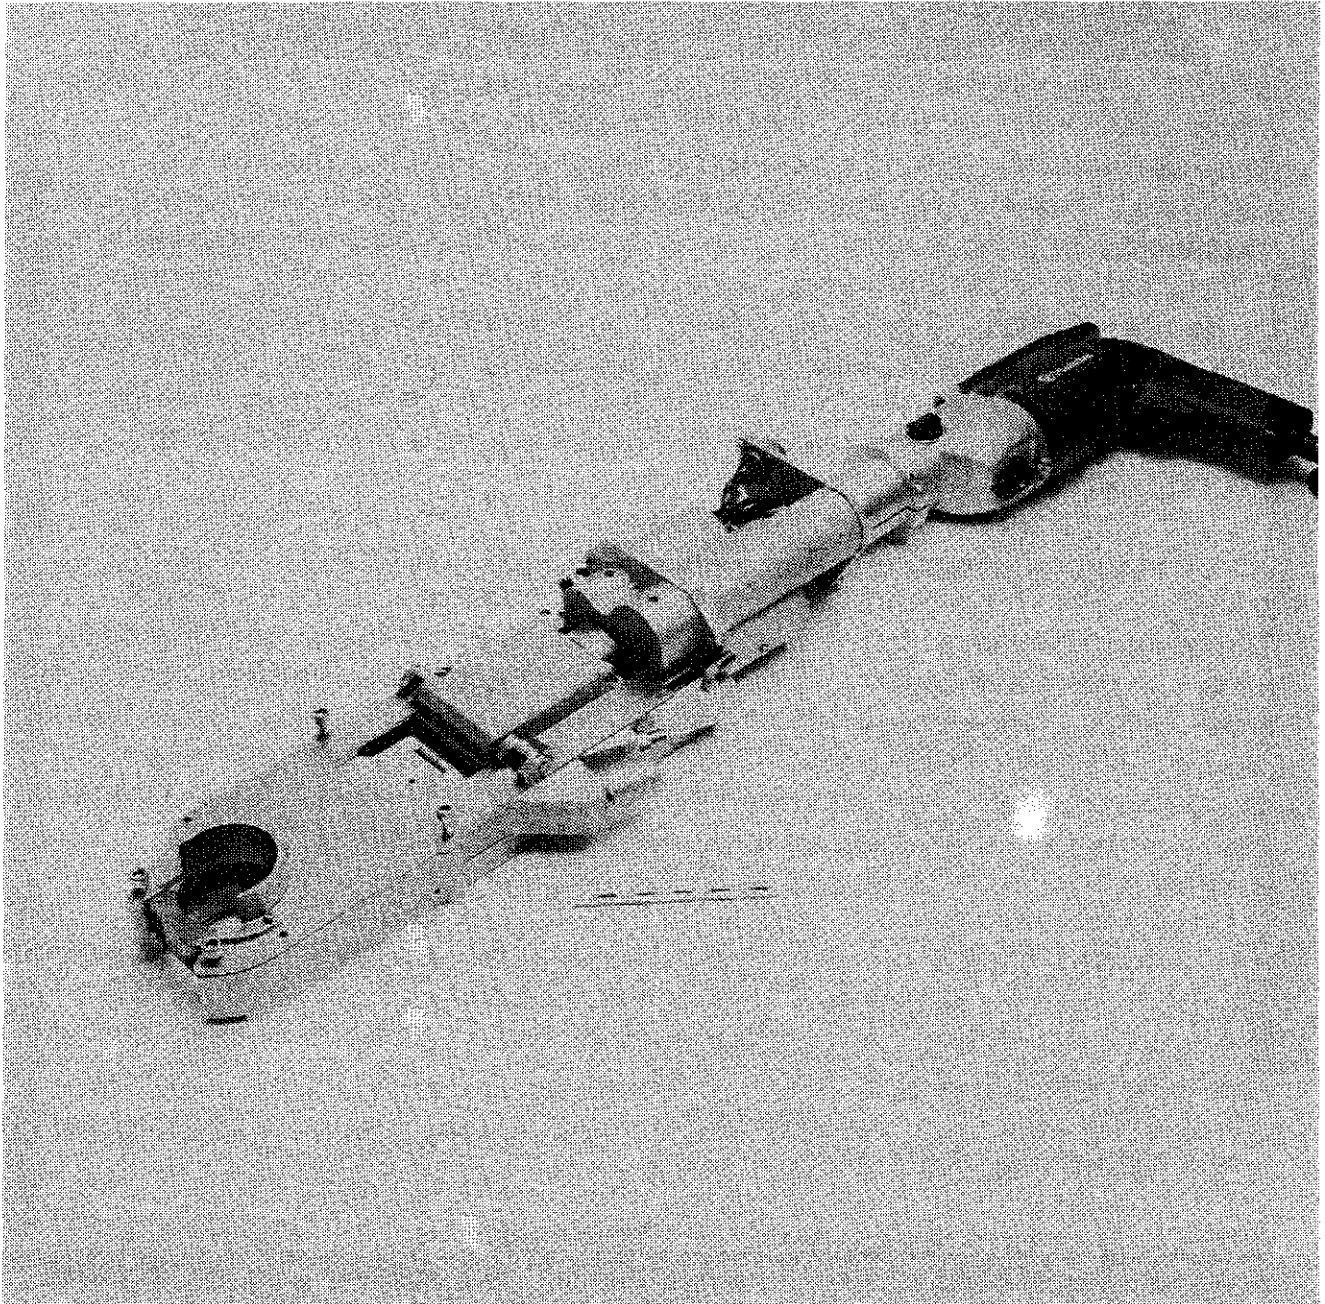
Typical Remote Handling Tool (JET Pipe Cutter)
